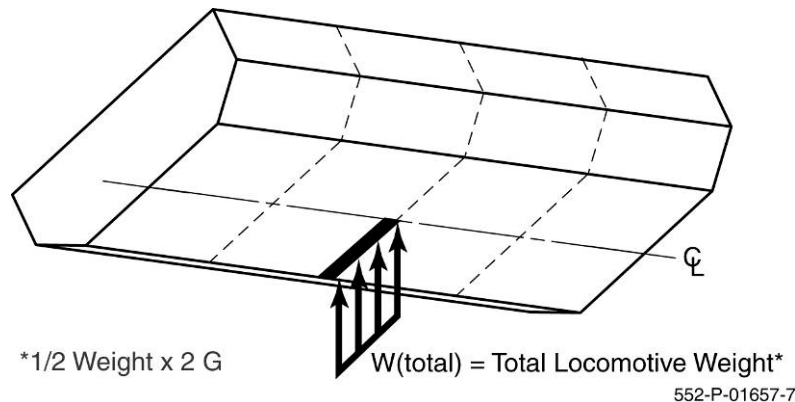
Schematic of FRA JD Load on Tank Bottom Wall
